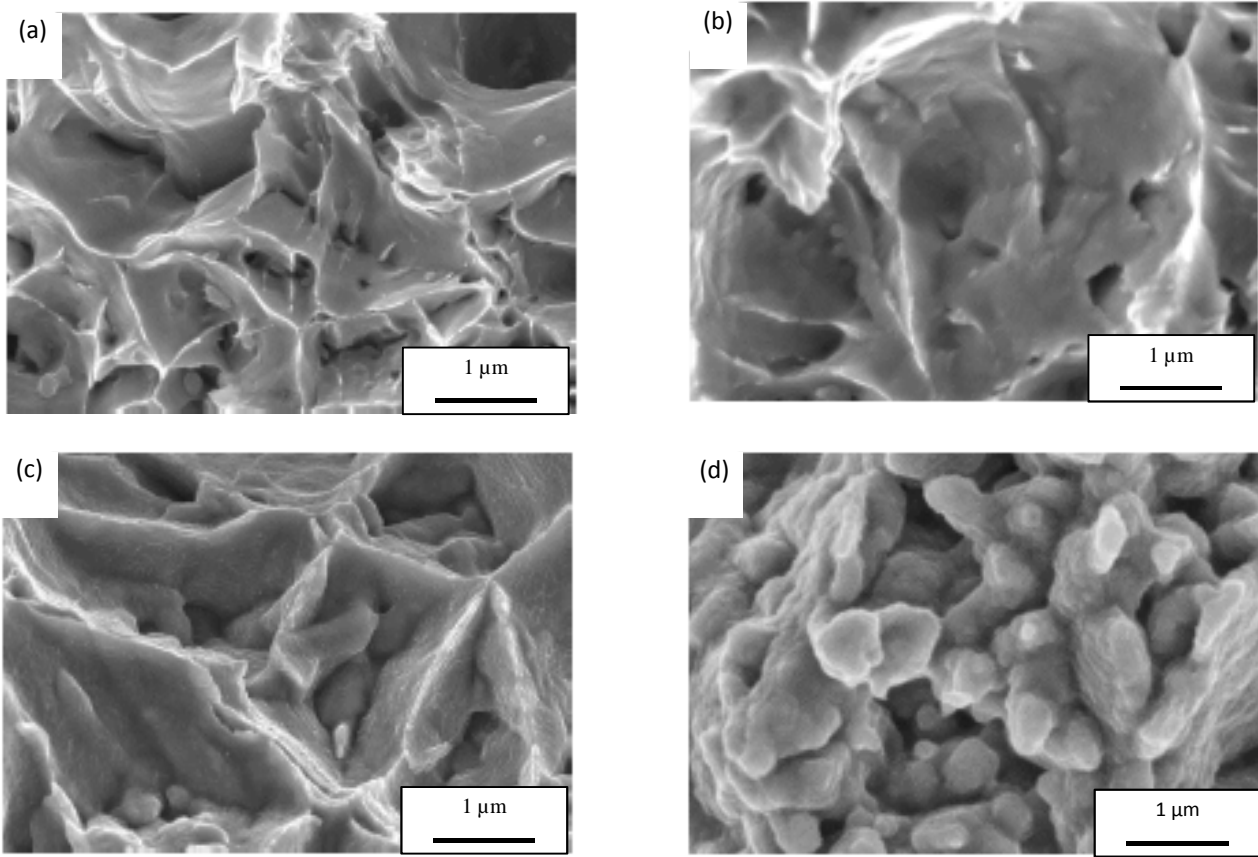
High-magnification views of the fracture surface of FT specimens pulled along AD, at $7 \times 10^{-4} \text{ s}^{-1}$, at (a) 25°C, (b) 400°C, (c) 650°C and (d) 850°C
